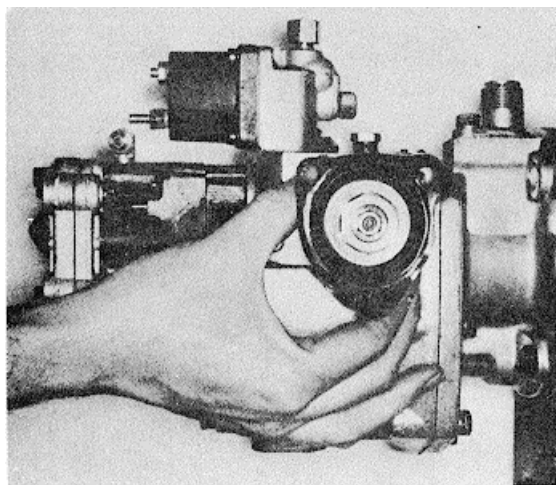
, F5302. Removing AFC bellows and piston assembly
